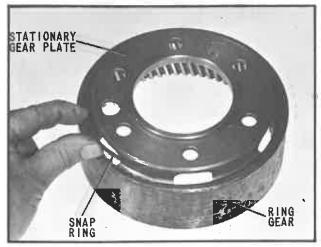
Assembling Stationary Gear Plate and Ring Gear
